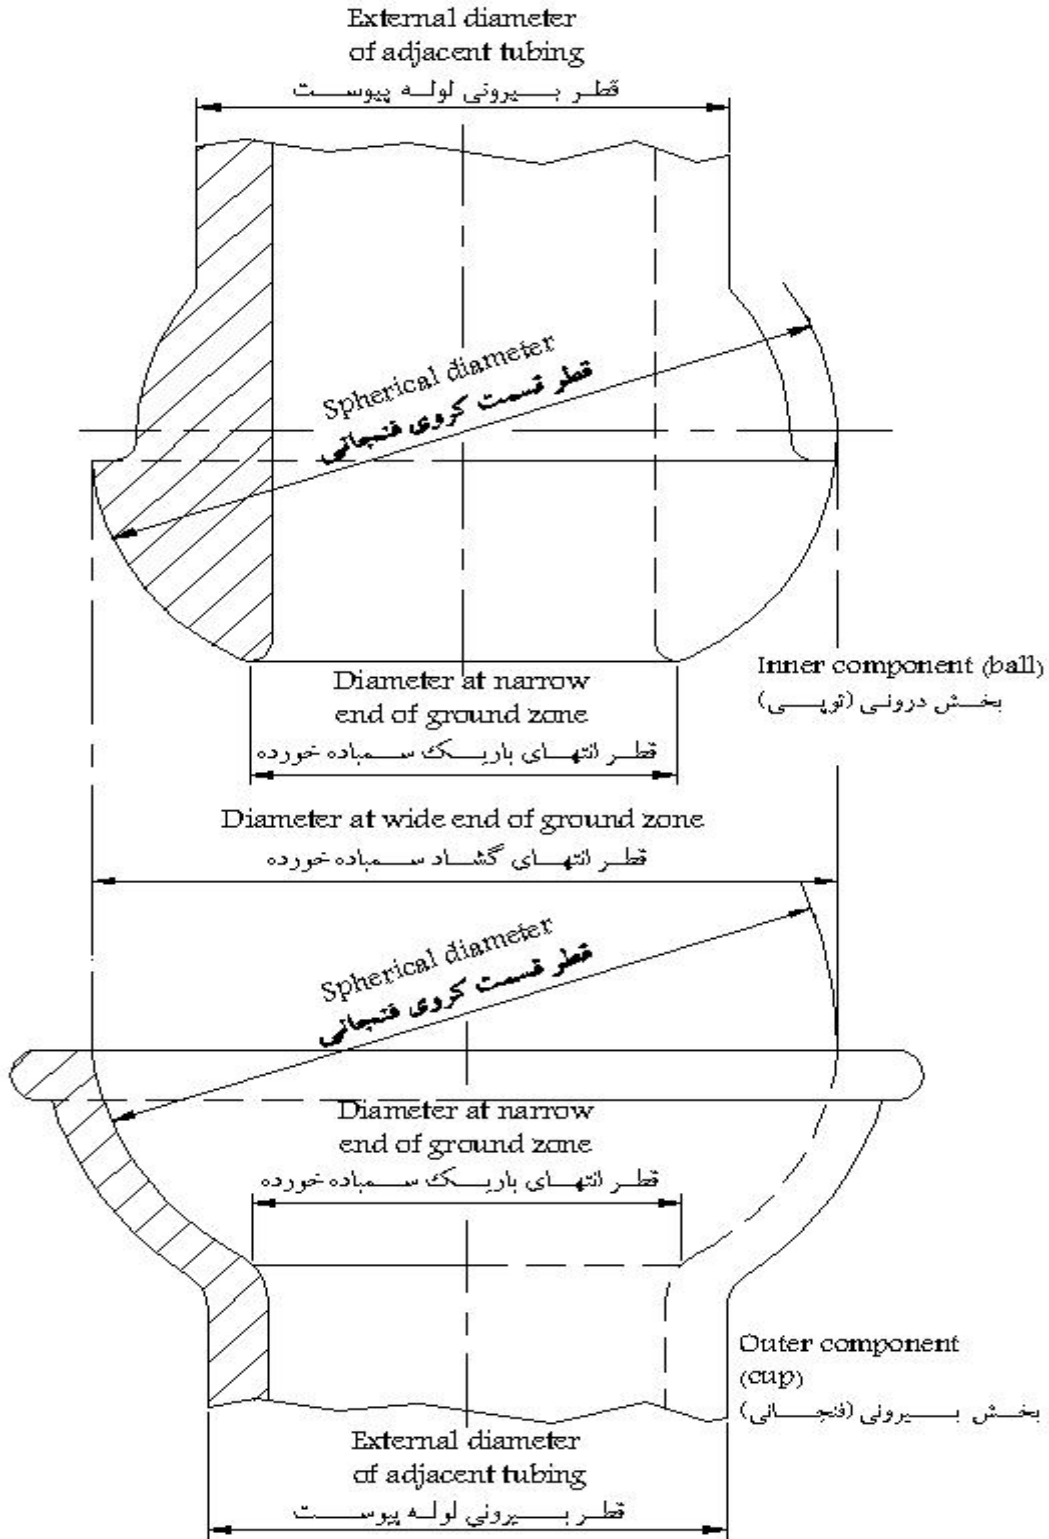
DIMENSIONS OF SPHERICAL JOINTS
